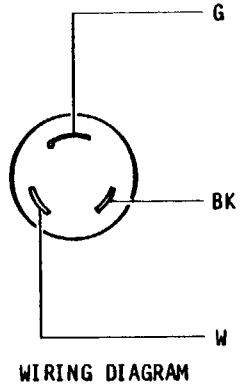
Power cable assembly, 11021164, unit 2, M35A2.
